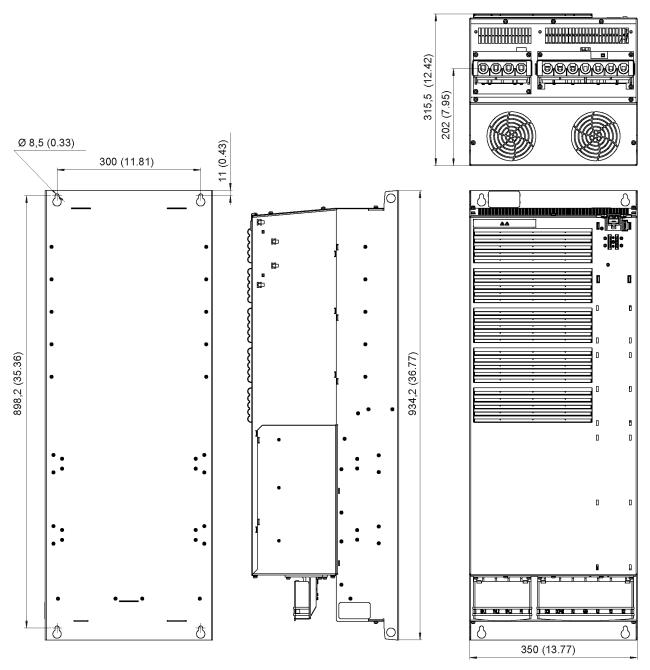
Dimension drawing, PM340 Power Module, frame size FSF (with integrated line filter); all dimensions in mm and (inches)
